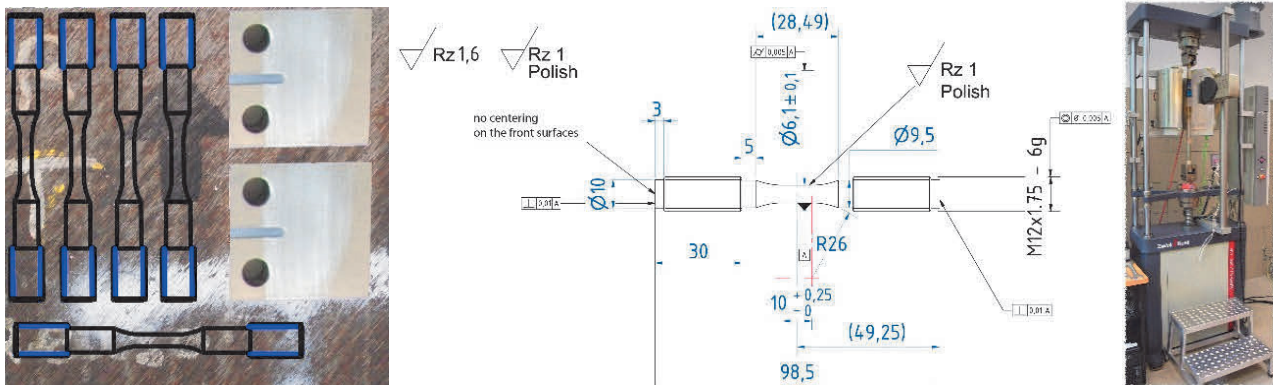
Cutting plan of block P91 (left), the shape and dimensions of specimen (middle), and Kappa SS-CF testing machine (right)
